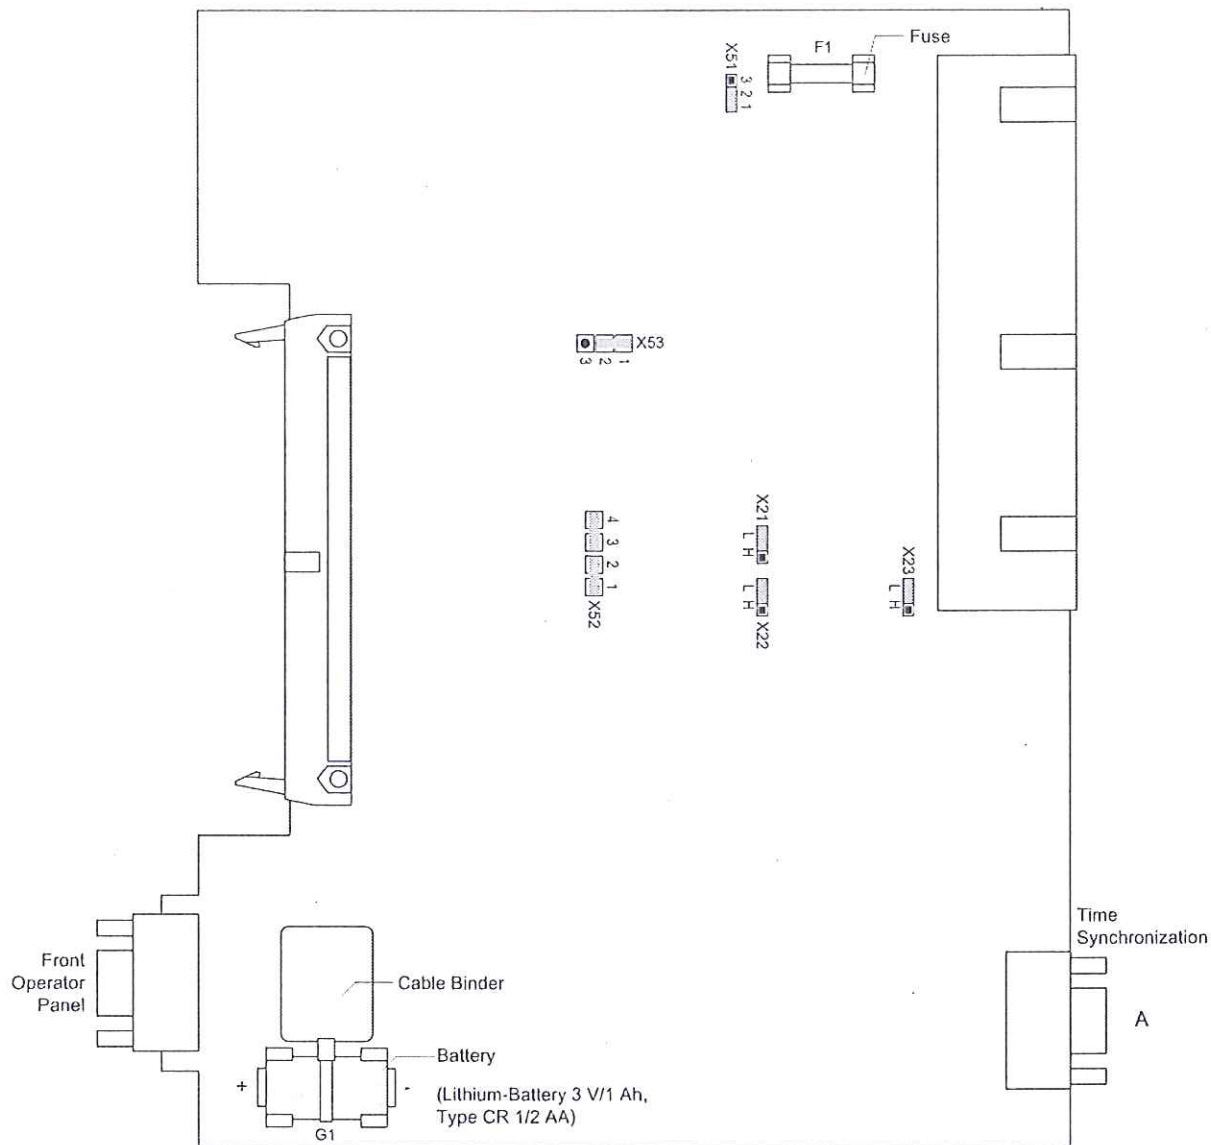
Processor printed circuit board A-CPU for devices up to release .../DD with jumpers settings required for the board configuration
